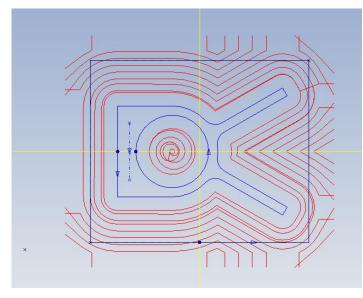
Leg Assembly Bracket ESPRIT File for Milling Machine
